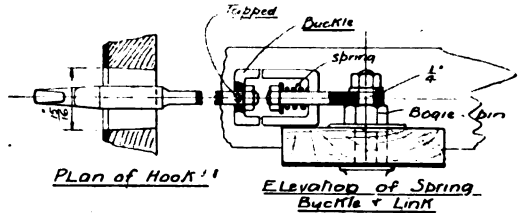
SEPARATE SPRING DRAW-BAR GEAR.
